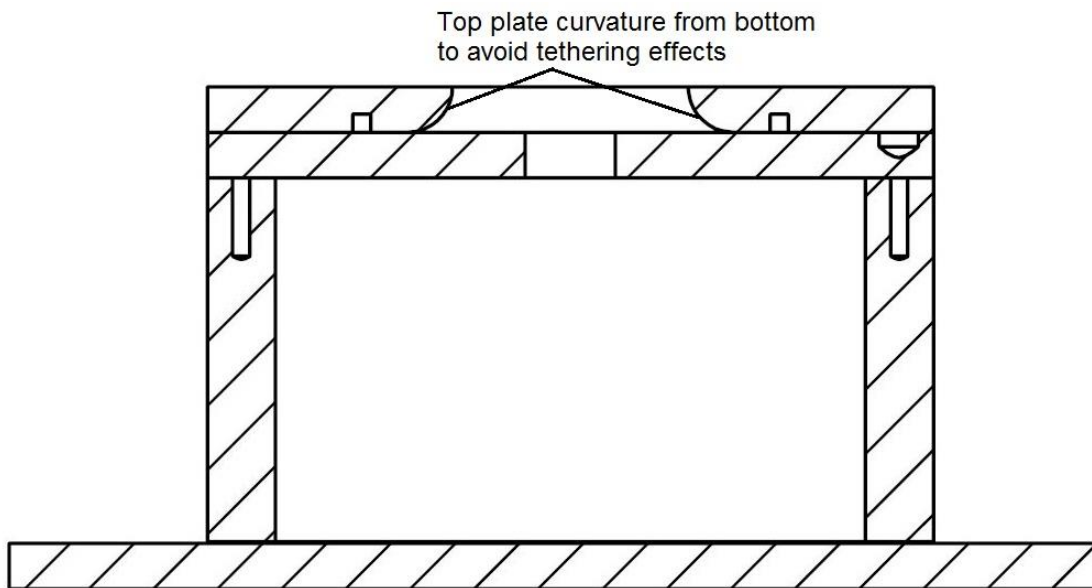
Sectional front view of the chamber showing the curvature on the top plate.
